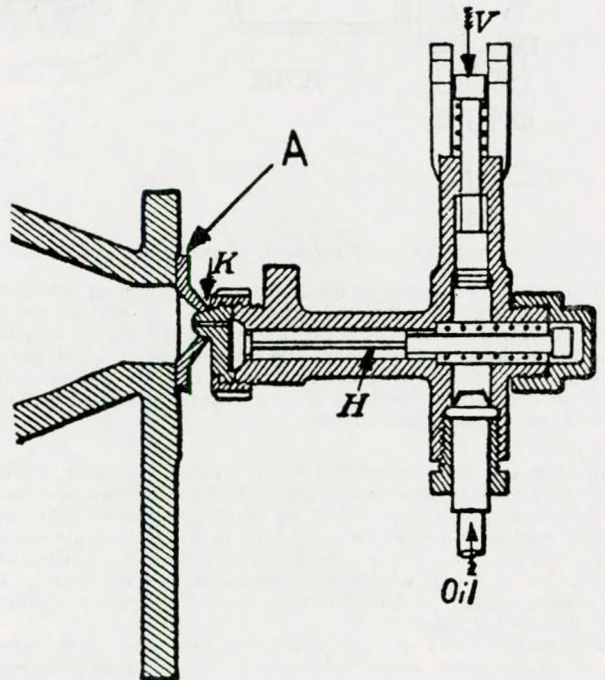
Hornsby-Akroyd vaporizer valve box, later type.
